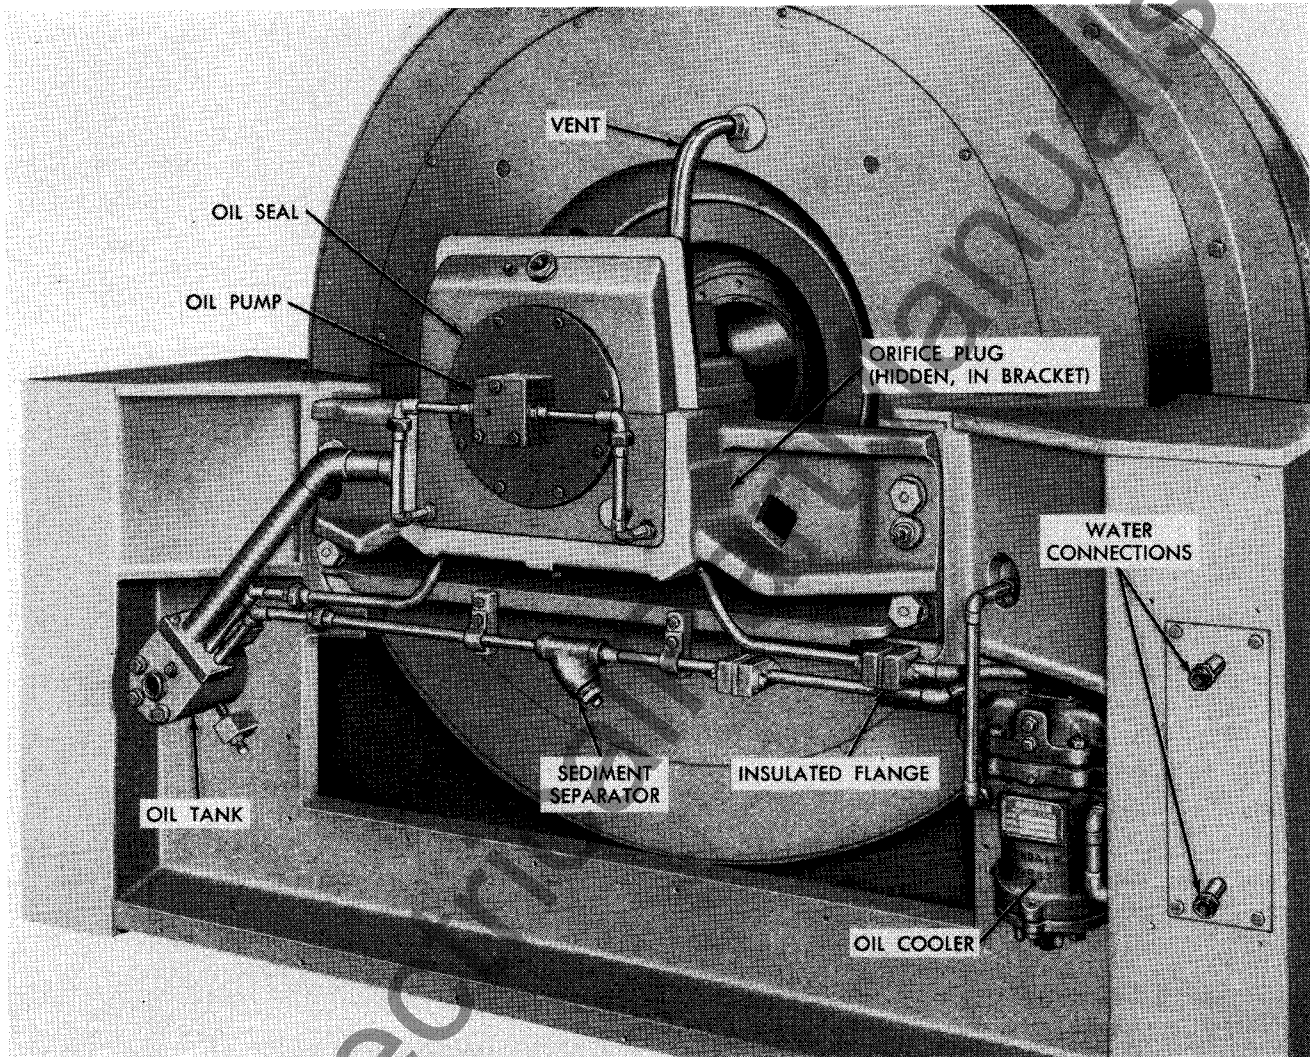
Two-Pole Squirrel Cage Motor with Forced-Flood, Cooler-Equipped Lubrication System
